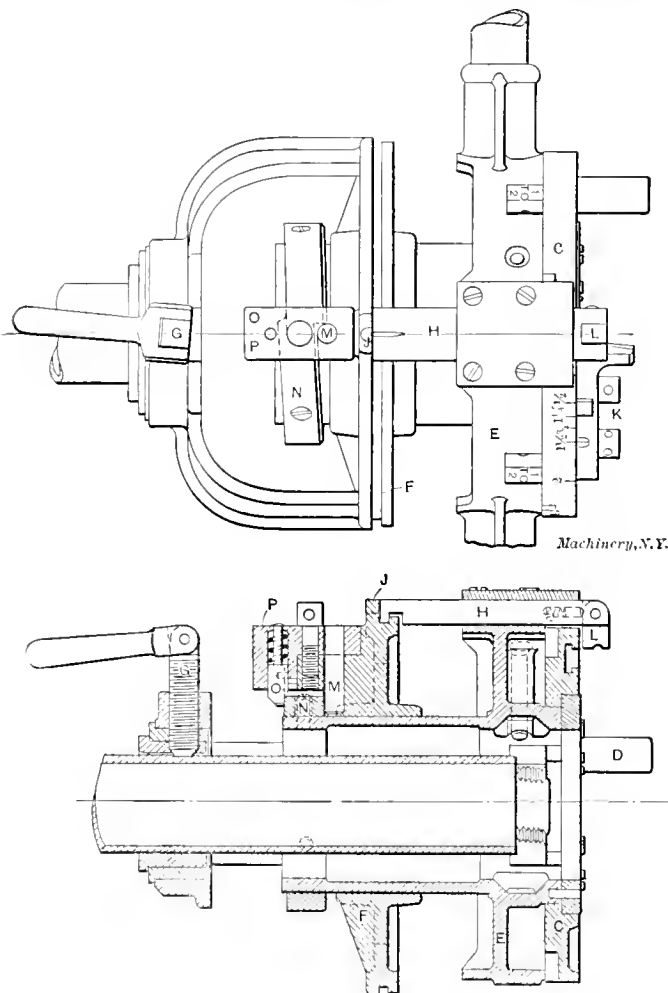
Plan, Section and End View of Hart's Buckeye Pipe Die-stock.
